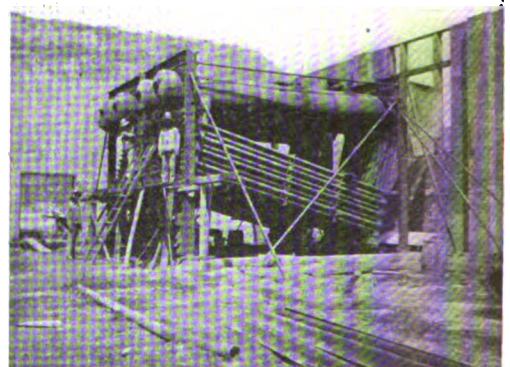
TWO 250-H.P. BABCOCK & WILCOX BOILERS IN COURSE OF ERECTION IN PEKING CHINA.
